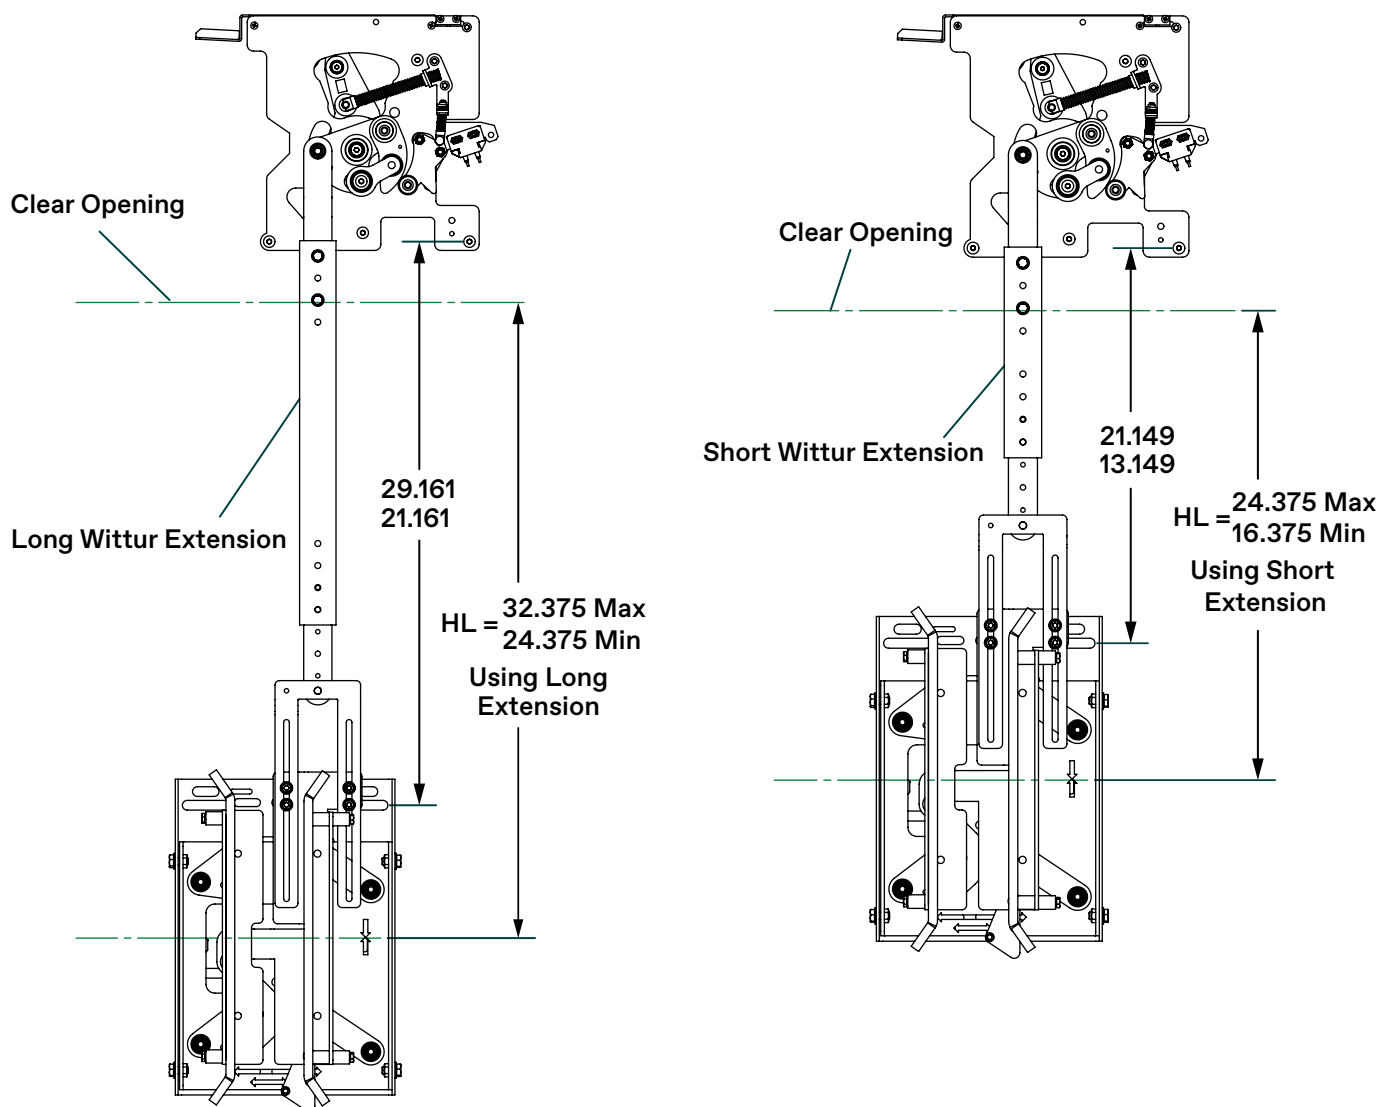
Adjust Clutch and Linkage - Short and Long Wittur Extensions
